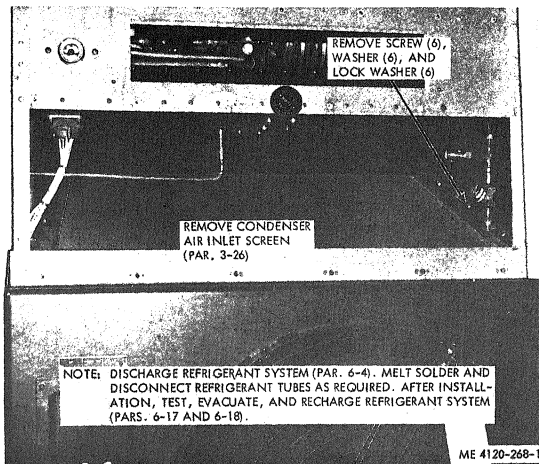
Condenser coil removal and installation (Sheet 2 of 2).
